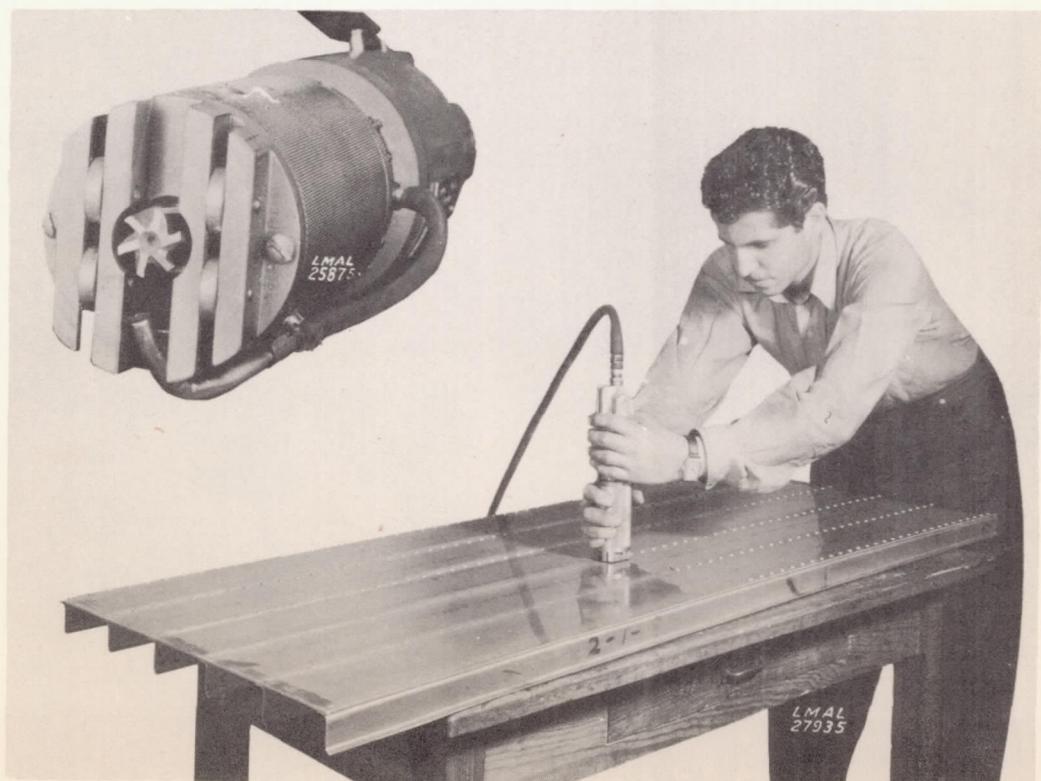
End-milling tool for removing the protruding portion of the rivet head.
